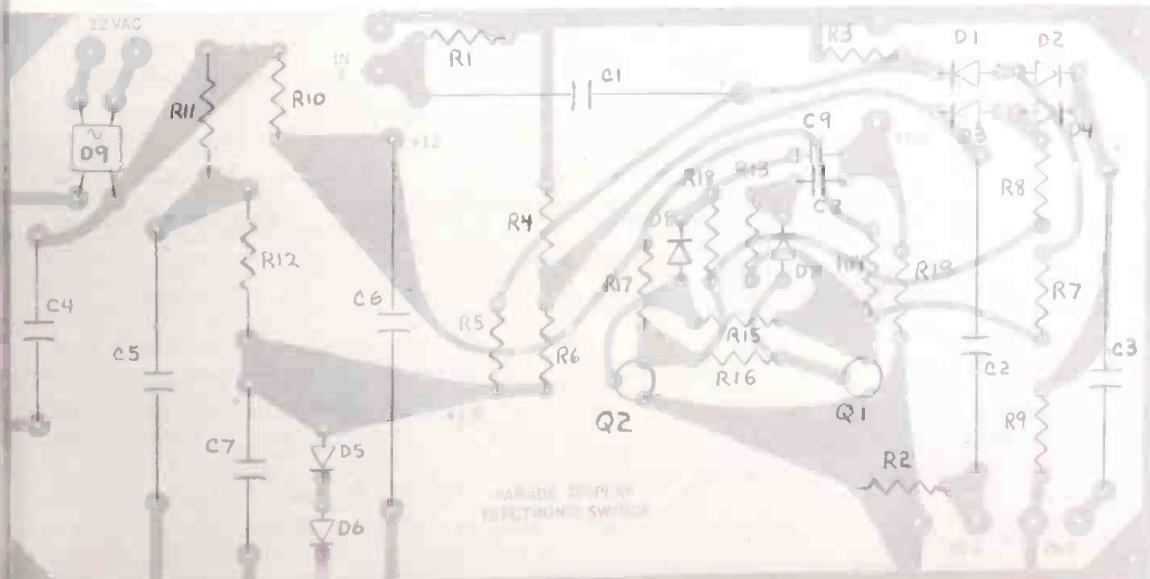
Exact size of circuit board and parts layout for the switcher.
